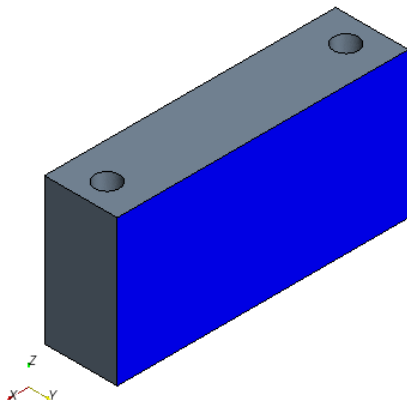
2-sides fire tube geometry without burners, 72x18x36 inches, $d=6$
